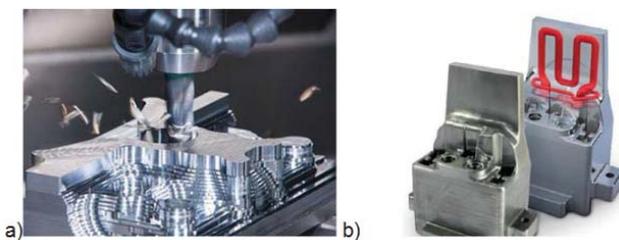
Examples of Joule printing: a) tools made of H13 tool steel and b) tools with conformal cooling channels [9]
